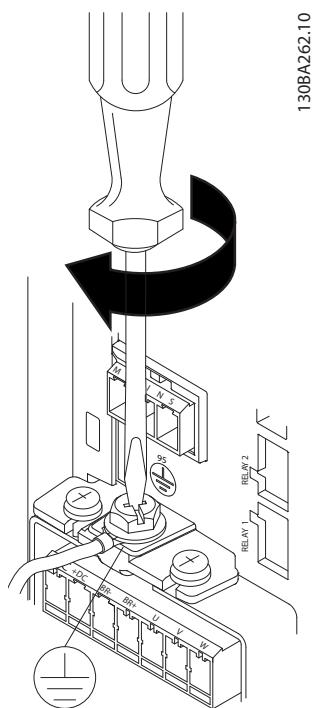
When mounting cables, first mount and tighten ground cable.
